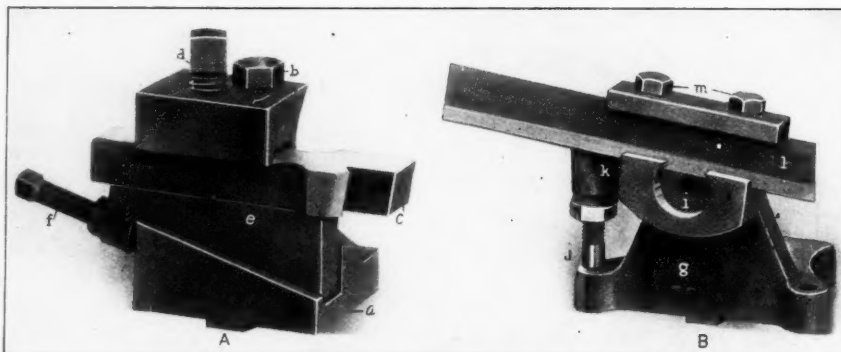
Open-side Forming Tool-holder and Standard Universal Cut-off Tool-holder for Cut-off Tools of the Blade Type
